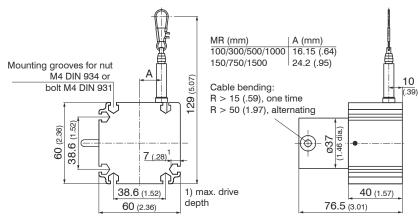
Dimensional drawing ... - FD60 - CR - P, dimensions in mm (inches), not to scale
